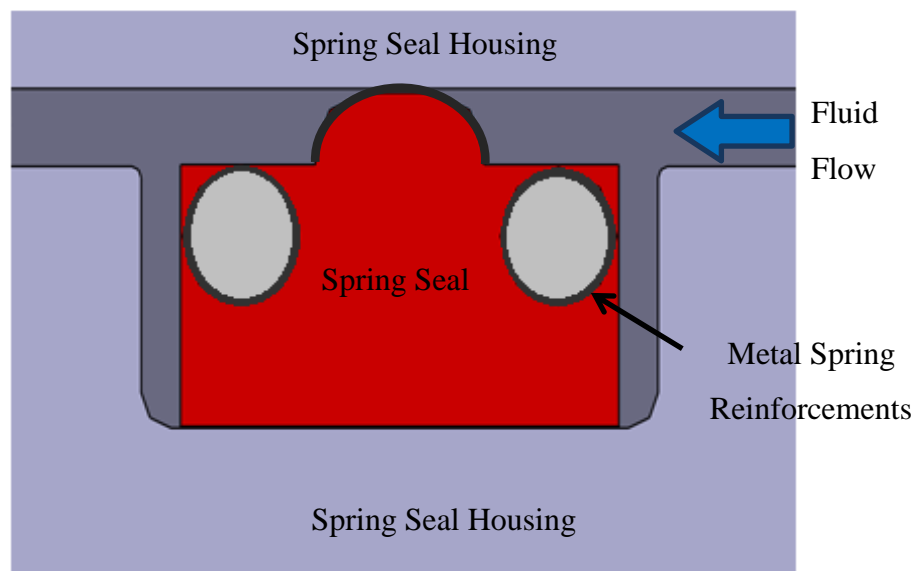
Display of a cross-sectional view of a spring seal compressed by the spring seal housing gland surfaces.
